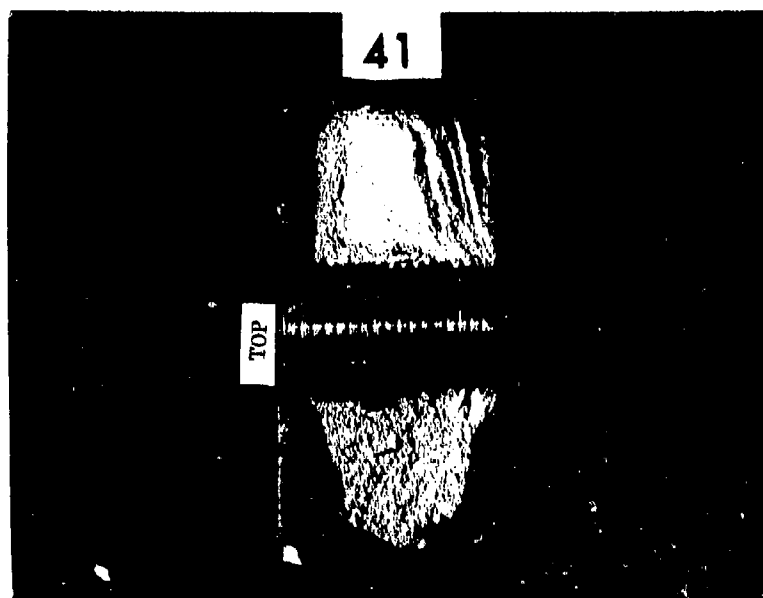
Close-up of Fatigue Fracture of Specimens with Tridair 3/8-24 Size Insert. Insert Installed by AFML. Torqued Bolt in Inserts During Test.
